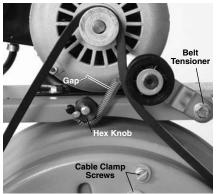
Torque Limiter Adjustment. (Shown With Belt Guard Removed)
